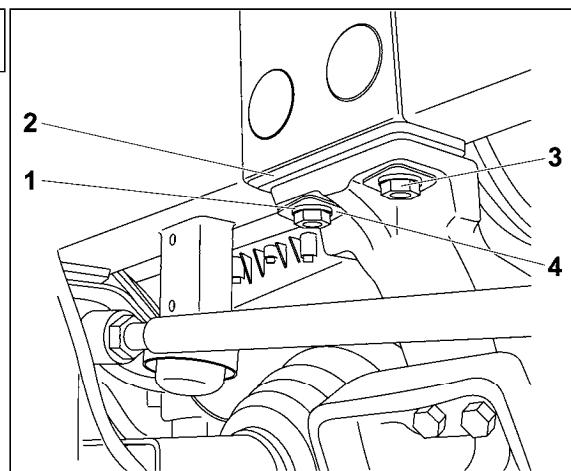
Attachment of frame to the cross girder behind final drive
